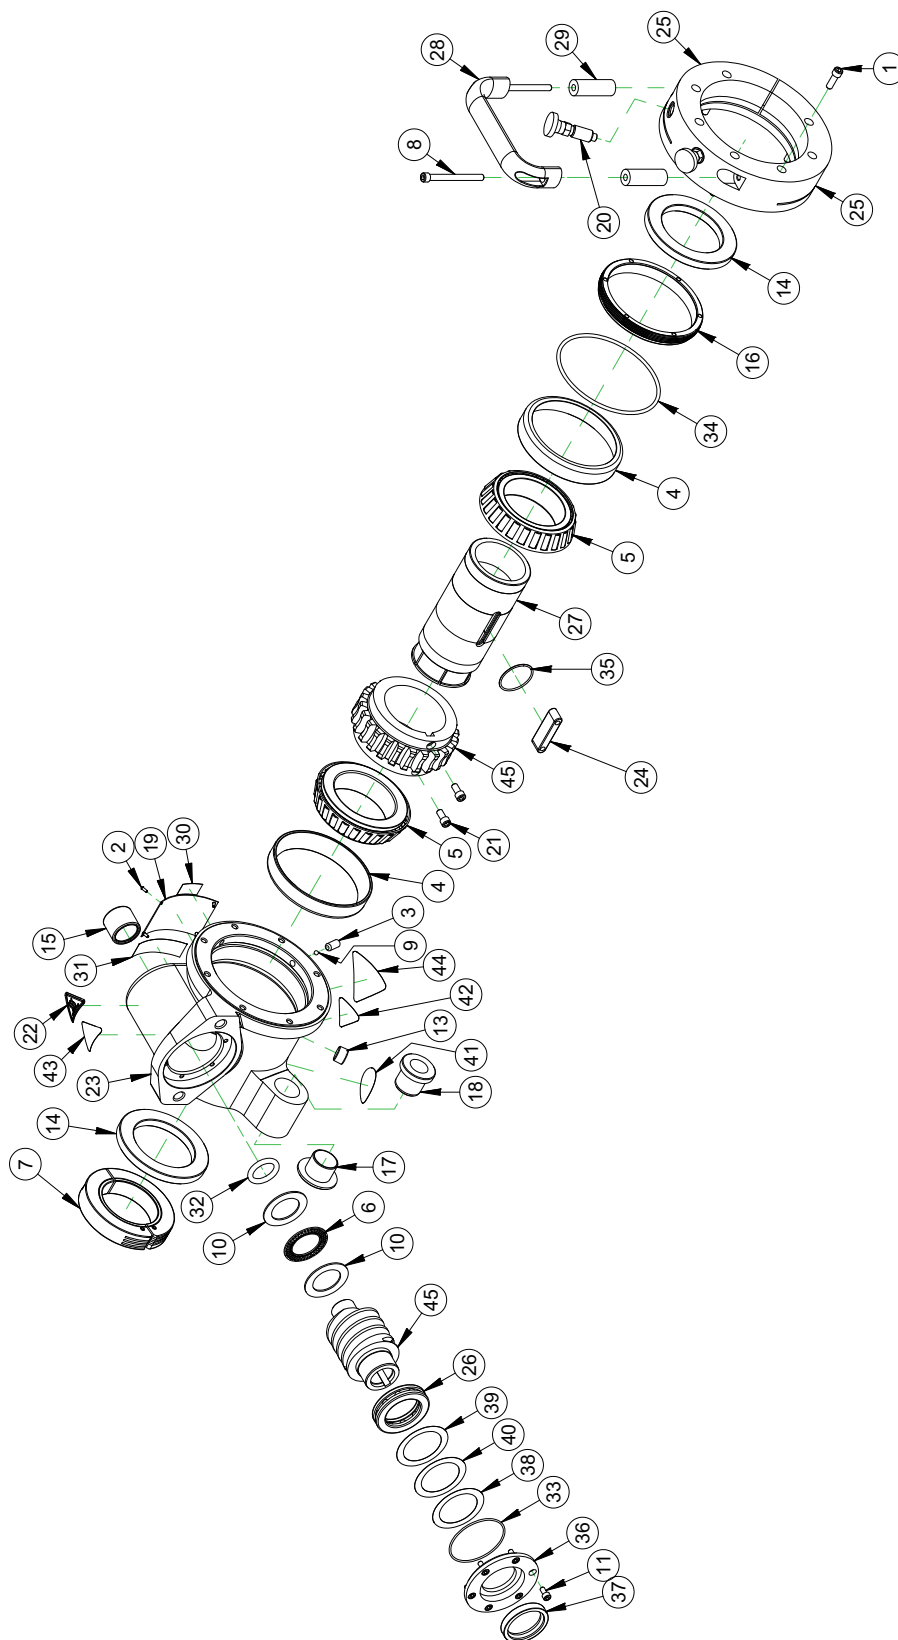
RDU 12:1 ASSEMBLY (P/N 53165)
